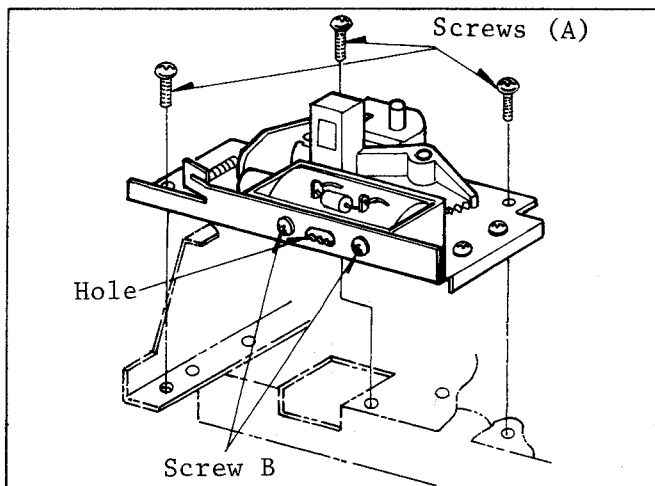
Clearance Adjustment of Eject Solenoid-(1)
